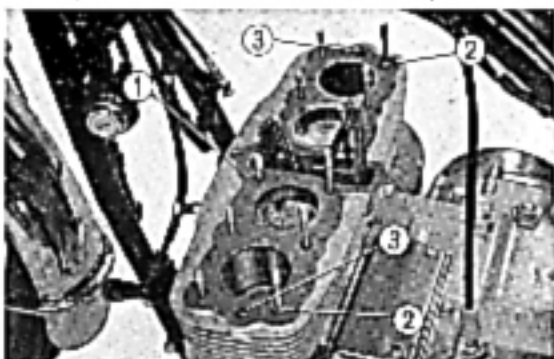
① Cylinder head gasket ② Dowel pins ③ O-rings
